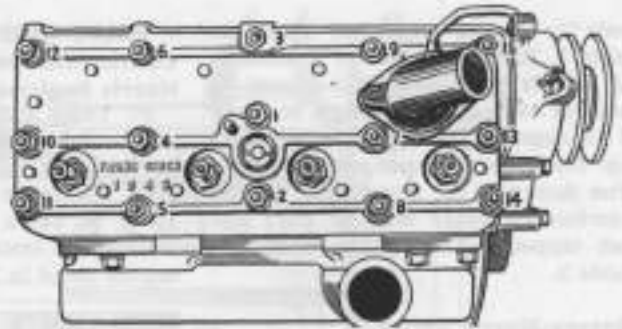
Continental 6-cylinder head nut tightening sequence.
